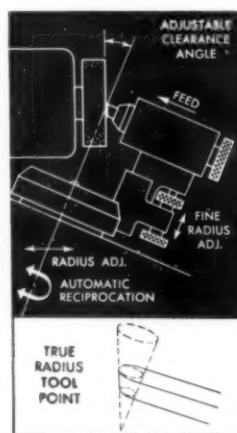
True-radius tool point with constant clearance angle for contour boring or turning. Upper sketch shows tool sharpening arrangement.
